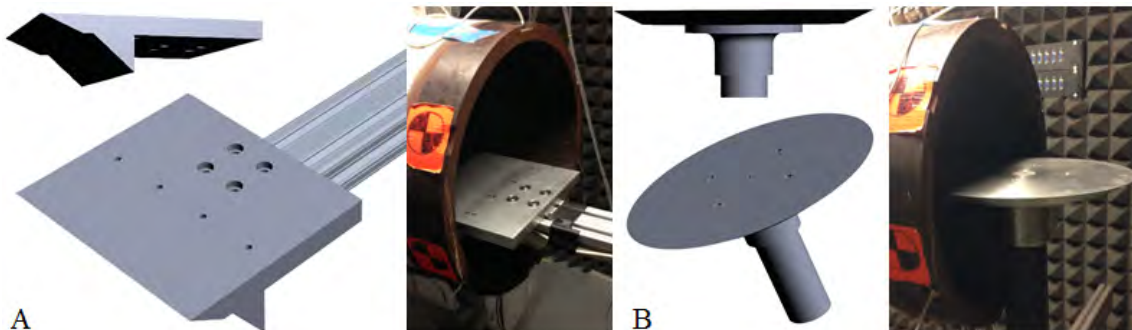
(A) Wedge pressure transducer housing fixture (B) Pie plate pressure transducer housing fixture
